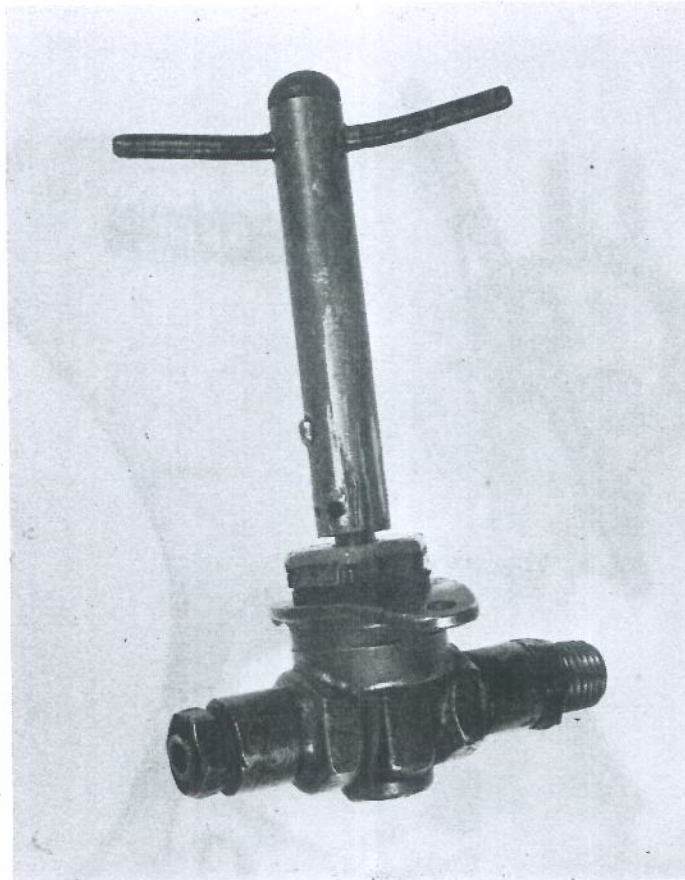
SHOWING FUEL COCK AND HANDLE ASSEMBLY WITH NO STOPS
